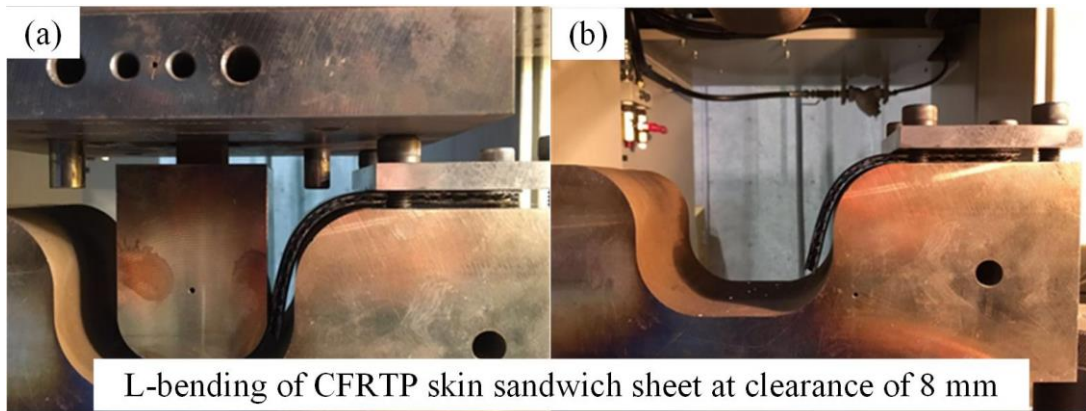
L-bending test of sandwich sheets with CFRTP faces at clearance of 8 mm.
